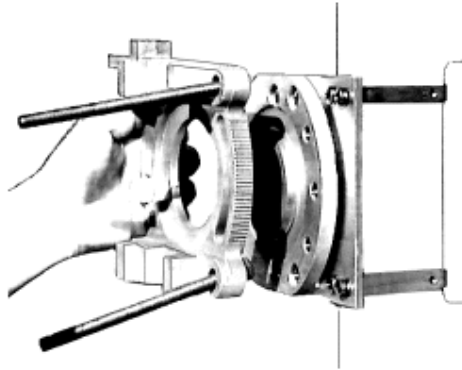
Mini-elevation Plate placed on Elevation Plate
